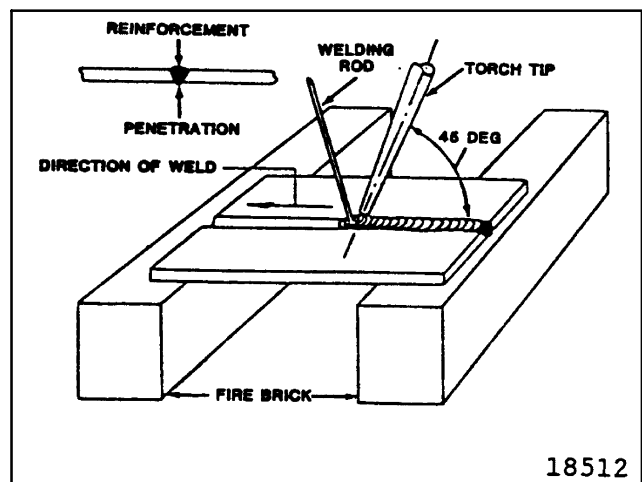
Position of Rod and Torch for a Butt Weld in a Flat Position
